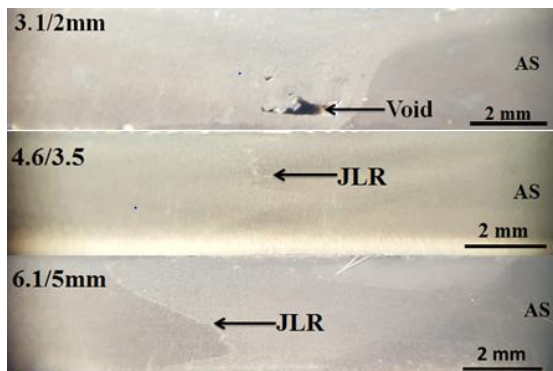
Macrostructures of three different tool pins 3.1/2mm, 4.6/3.5mm and 6.1/5mm at 500rpm.
